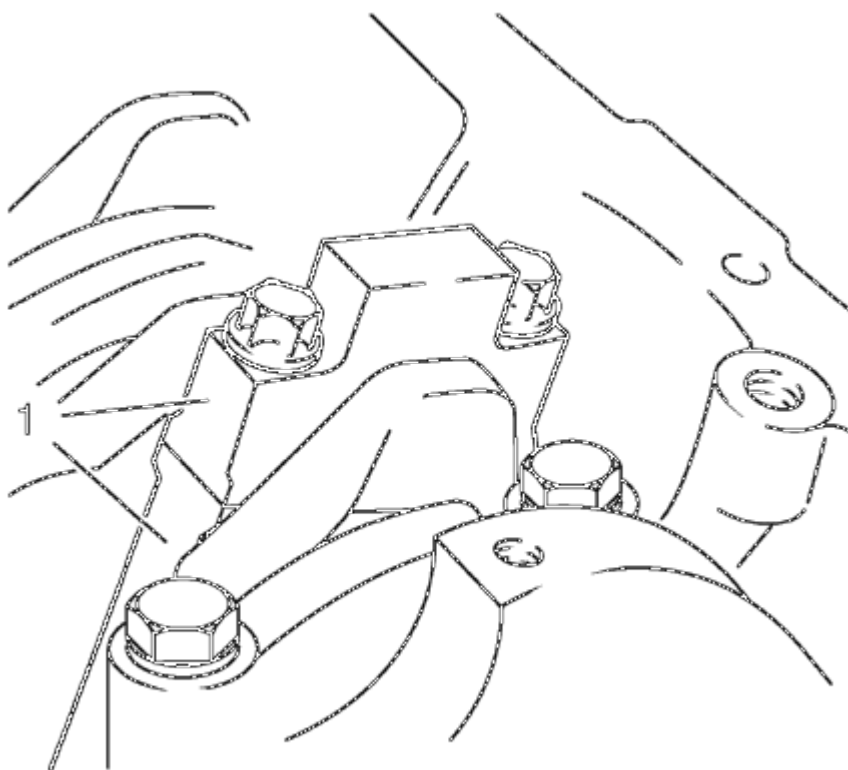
Marking Position On Connecting Rod Bearing Cap
